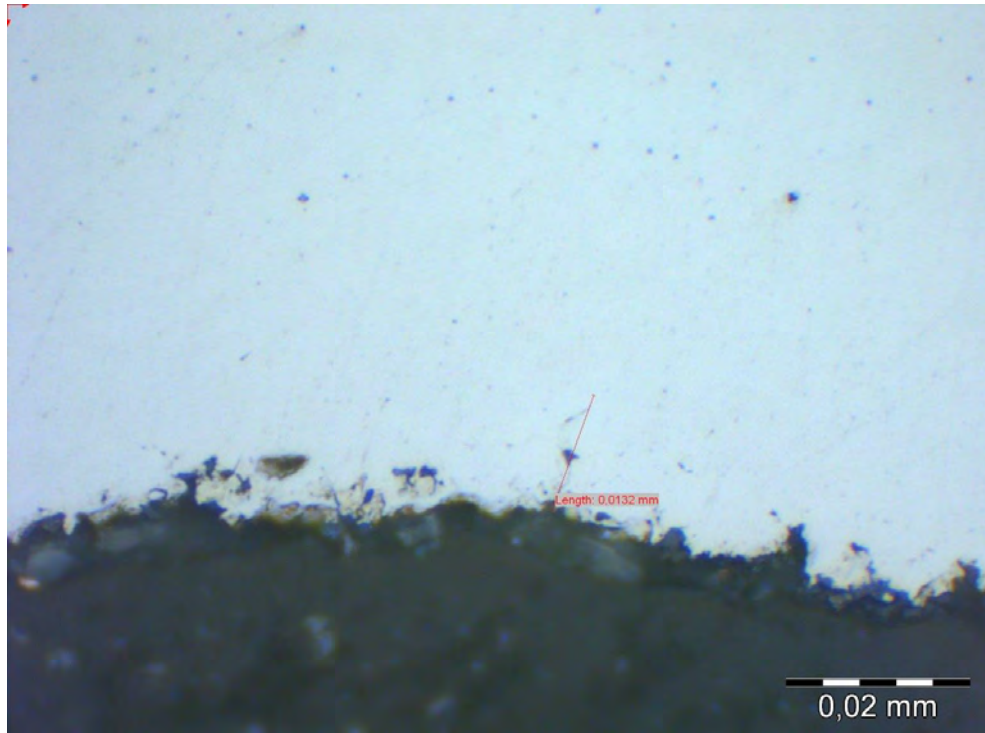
Cut three in crack at segment A, fourth ridge on barrel no. 14389
